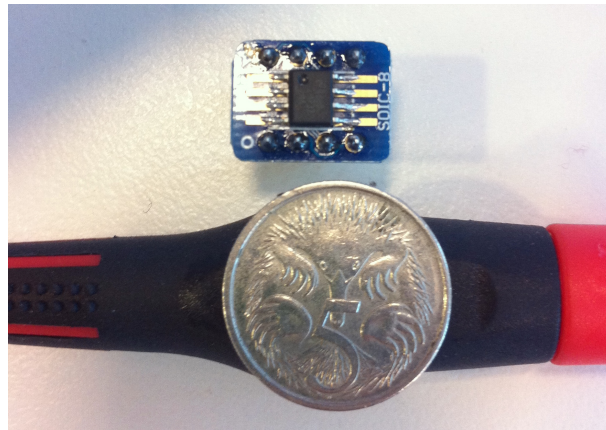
The Texas Instruments LM7322 dual-channel power op-amp is a small and low-cost device that can easily drive two MLP motor actuators. The LM7322 shown here is a large-package version soldered to a (blue) breakout PCB for the purpose of prototyping. The coin shown is an Australian 5 cent piece (diameter $\sim 20\text{ mm}$).
